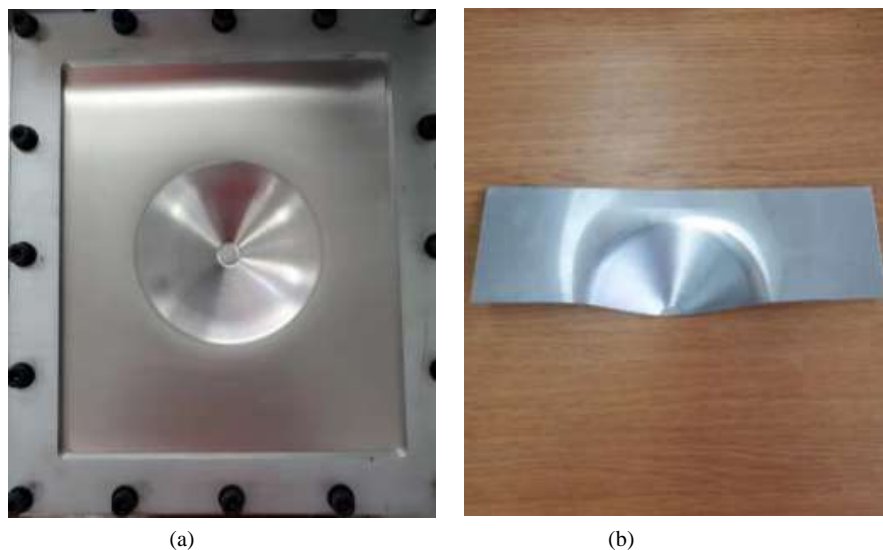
Formed sheet part (a) and half part after cutting (b)
